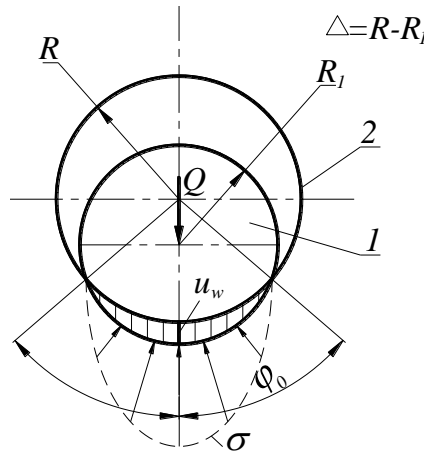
The design scheme of the cylindrical sliding bearing
